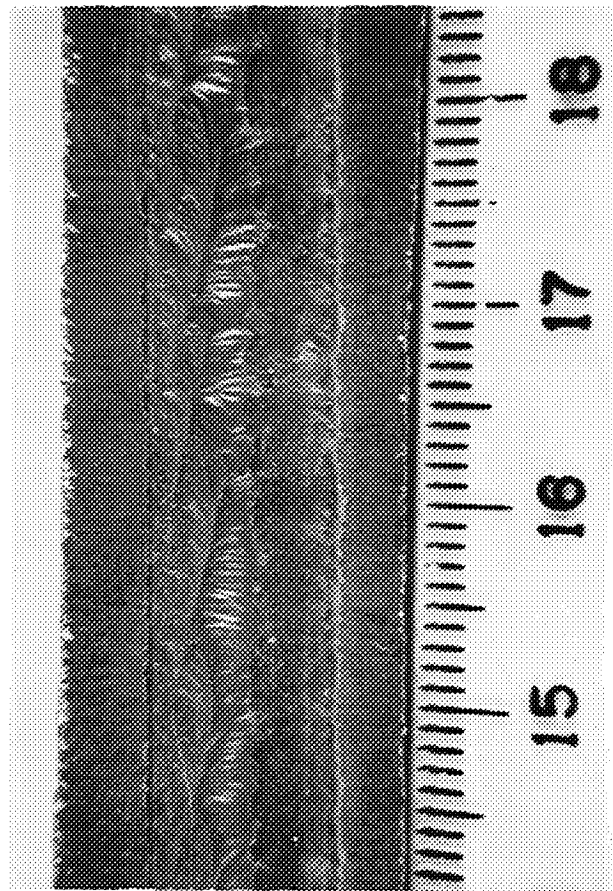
A Cover Pass Weld Made with a Tilted Torch.
